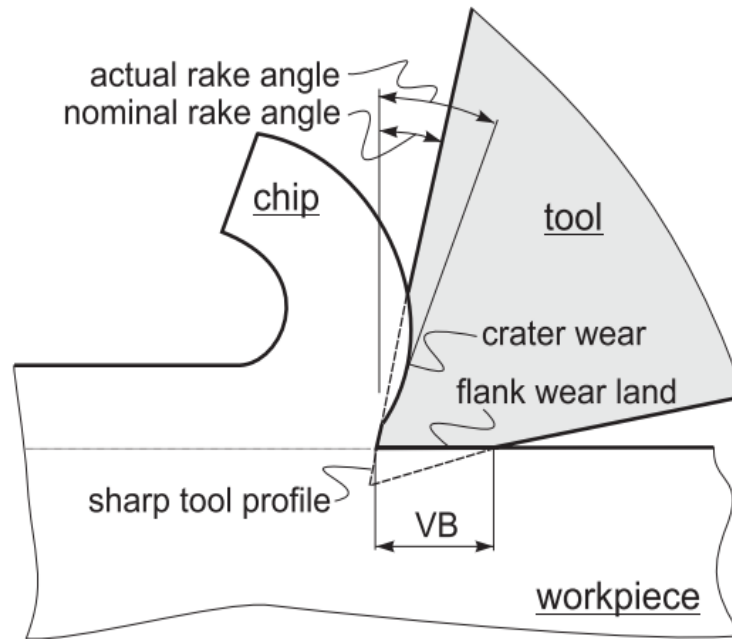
Cross-sectional view perpendicular to the main cutting edge of a worn cutting tool representing the effect of crater wear on a tool rake angle and the flank wear land[4]
